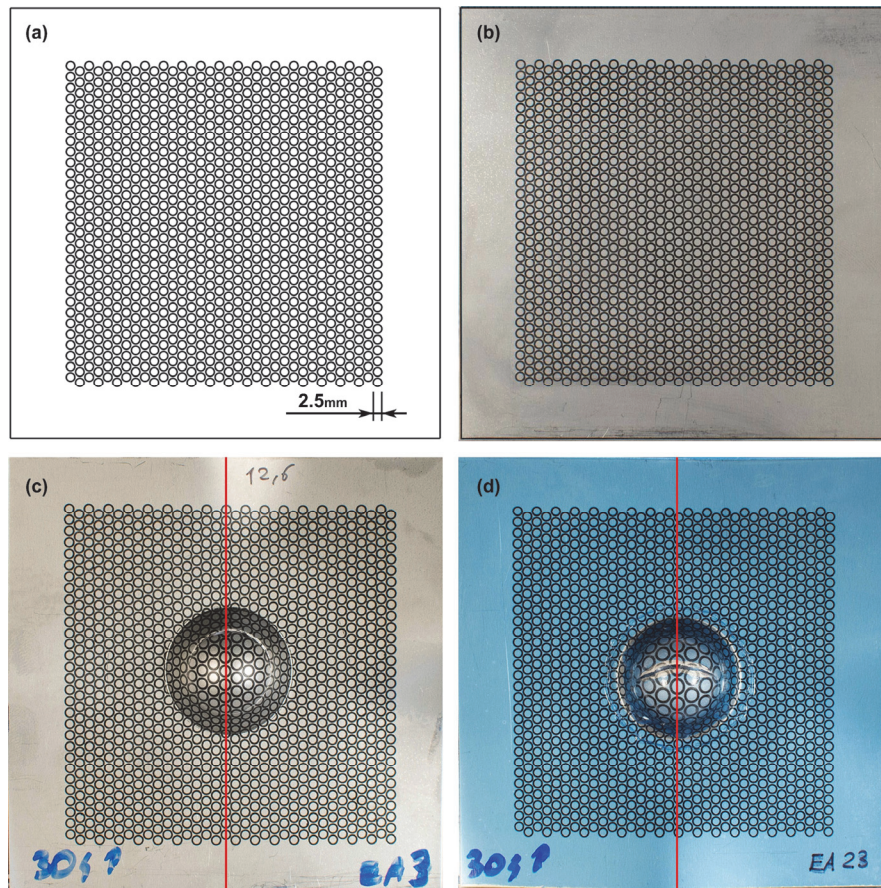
Technical drawing of the screen-printed sample used for the Erichsen tests (a), image of the sample before (b) and after the Erichsen test (c-d). Images c and d show AISI 304 samples in unlubricated and PVC-lubricated conditions, respectively. The circumferences intercepted by the red lines were used to measure the diameters in the longitudinal and transverse directions to the line.
